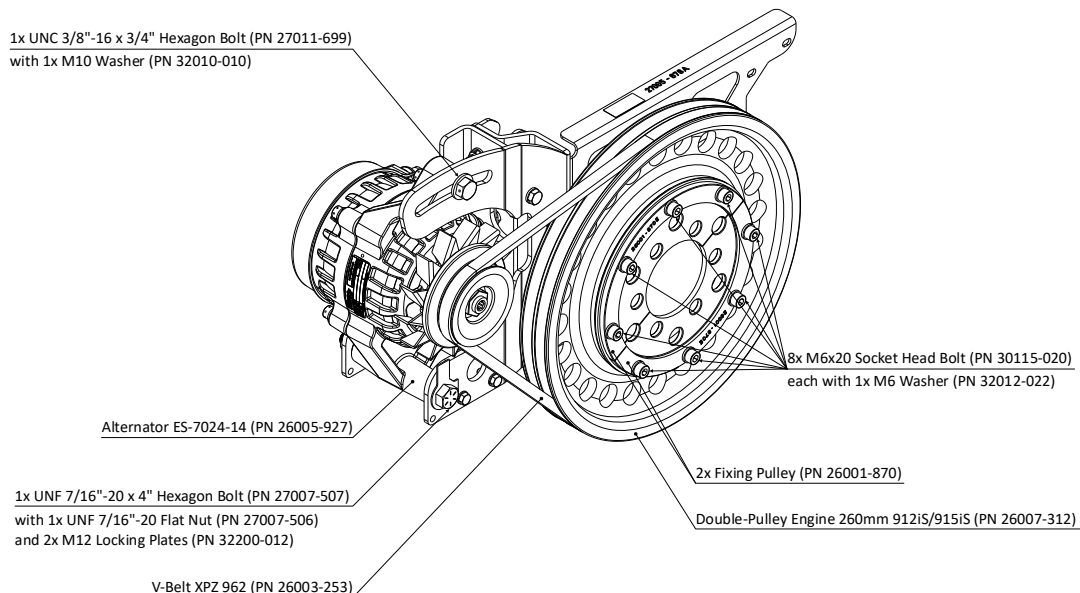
Isometric View Ext. Alternator Kit 70A Bank1 Rotax 912iS
